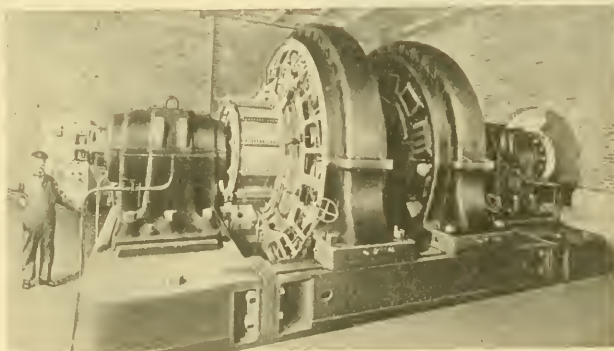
THE FIRST REVERSING MILL MOTOR INSTALLED IN THIS COUNTRY
